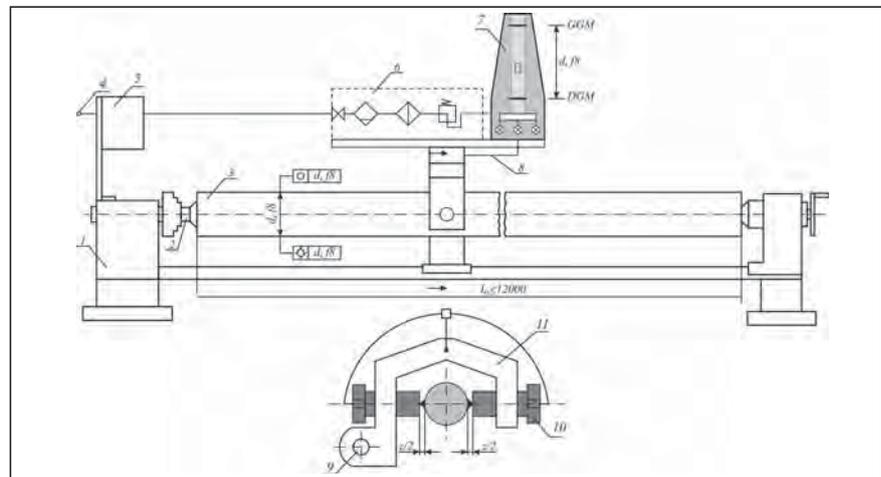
Pneumatic measuring-control system for piston rods. 1. Machine, 2. Vice kit, 3. Workpiece (piston rod), 4. Air supply, 5. Pipe line adaptor, 6. Air preparation system, 7. Measurement device, 8. Measurement pipe line, 9. Measurement head, 10. Measurement valves, 11. Measurement head adaptor
